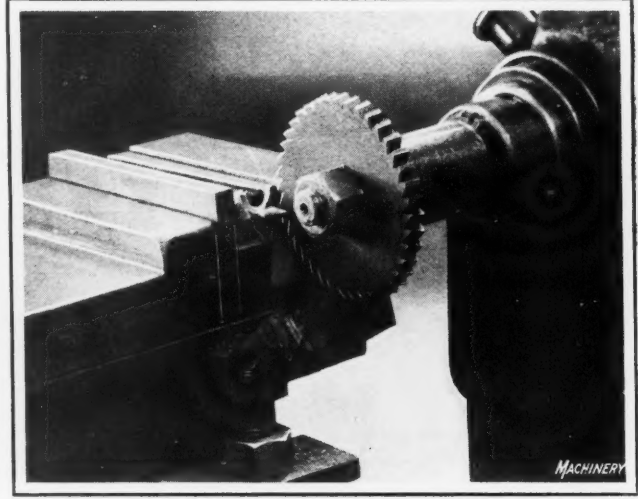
Machining a Bit under the Radial Cutting Edges with a Milling Cutter
